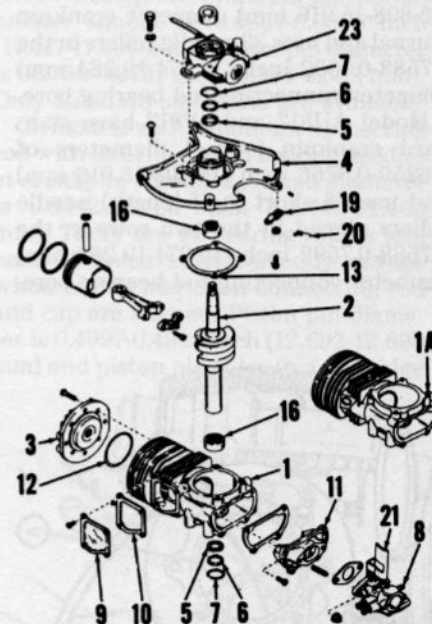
Exploded view typical of AV520 and AV600 engines. The cylinder and crankcase for some AV520 and all AV600 models is shown at (1A).
